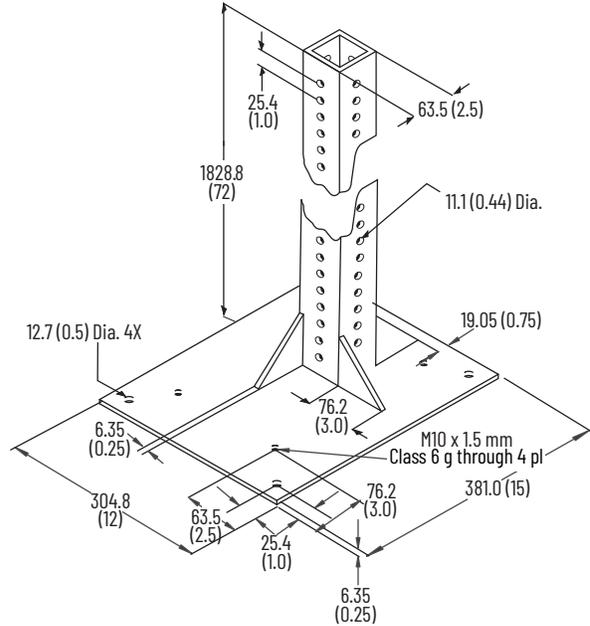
Pedestal Mounting Stand 440L-AMSTD [mm (in.)]
